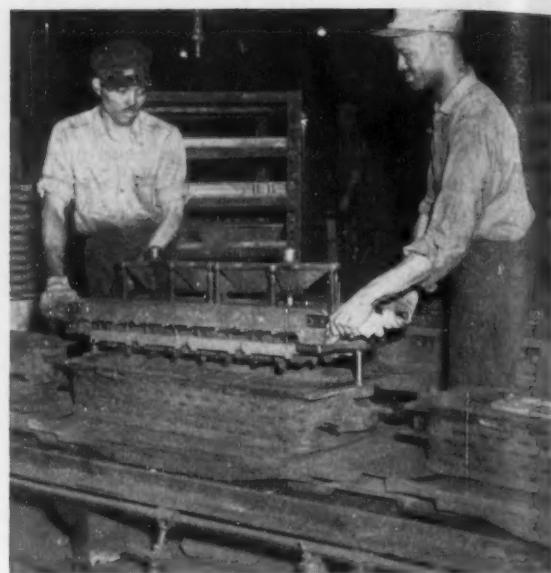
With this lifter, cylinder head core assemblies are transferred from chain conveyor racks to a drag mold. The lifter is released instantly when the core assembly is set.
